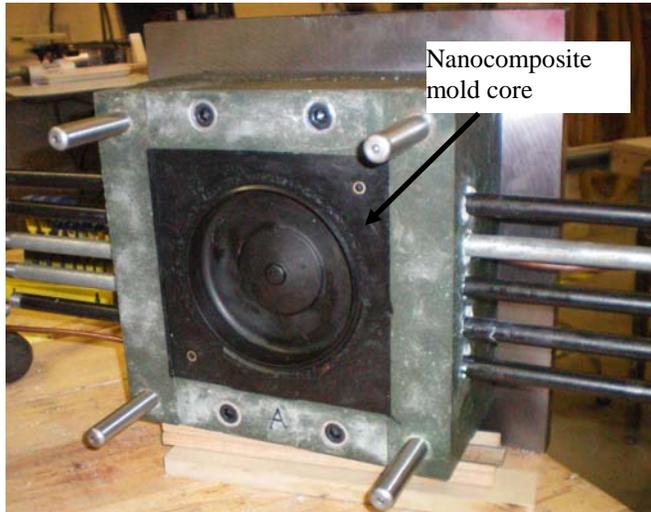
(b) Picture of one half of the fabricated mold with the nanocomposite mold core. (Source: Garg, 2009)
